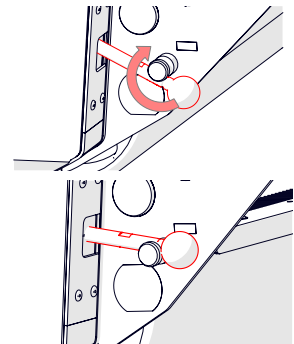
A - Parking brake disengaged (above pin), and engaged (below pin).
